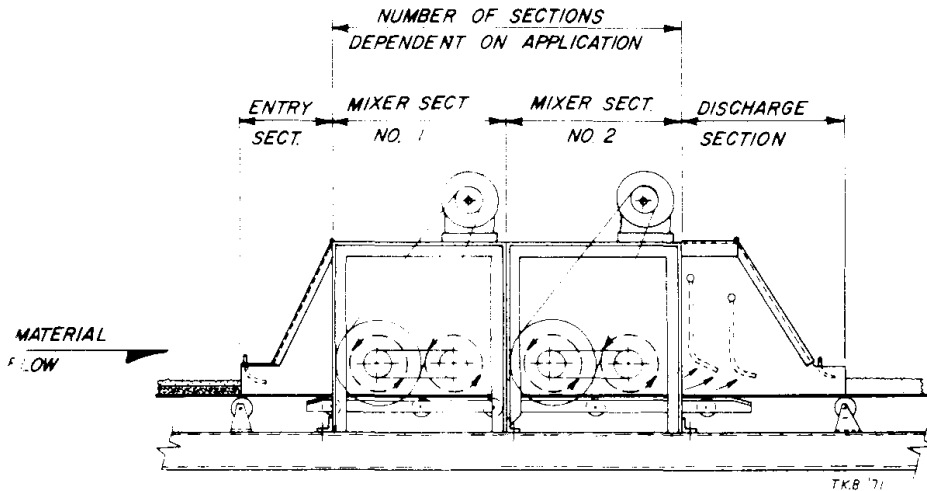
Typical Pekay belt-type mixer [Pekay Machine & Engineering Co., Chicago, Ill., USA]
